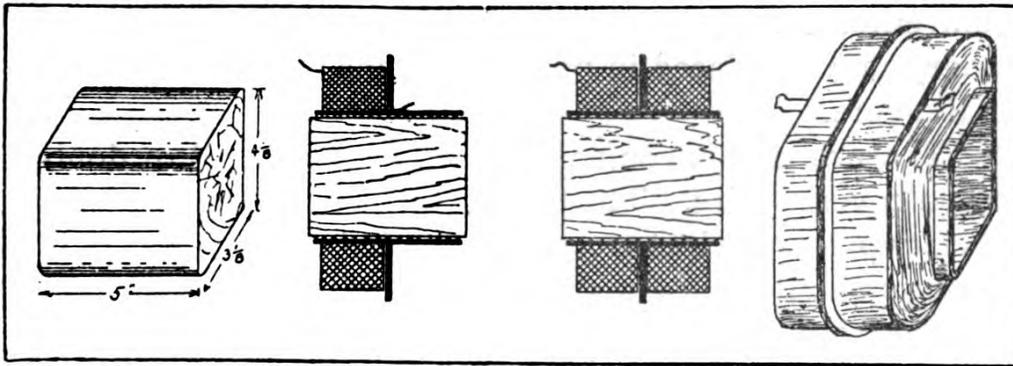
Details of secondary winding showing wooden block or form upon which the wire is wound
